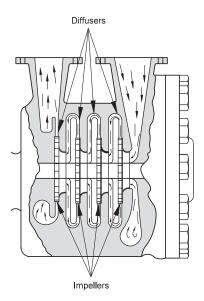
Cutaway of a four-stage centrifugal compressor showing the impellers, diffusers and return passageways.
